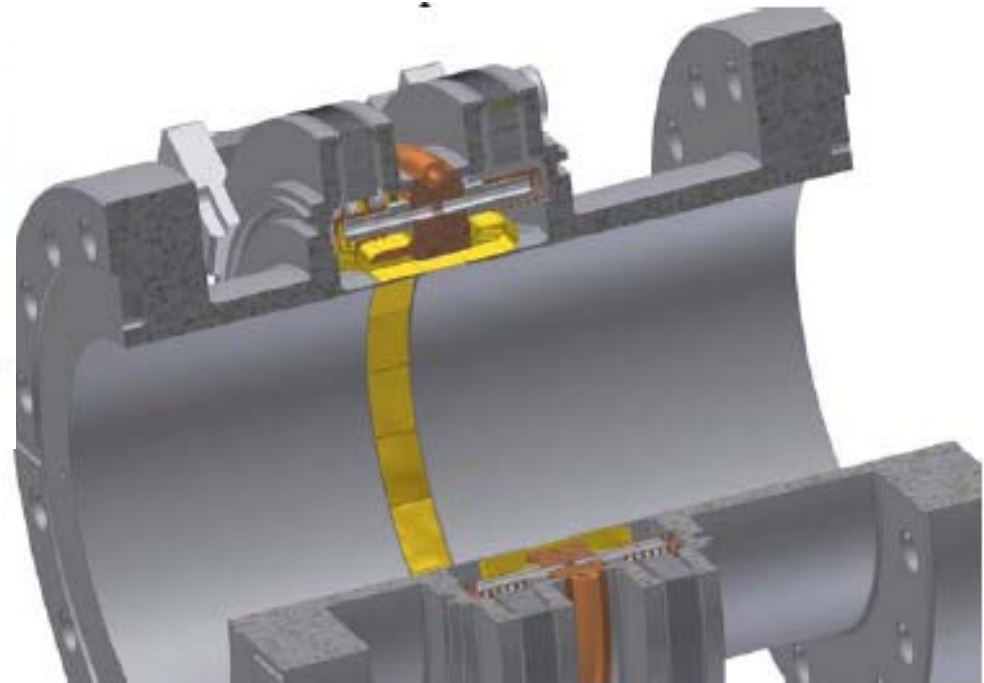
View of gold coated strip (a), supporting annular ring (b), RF shielded bellows assembly (c).
